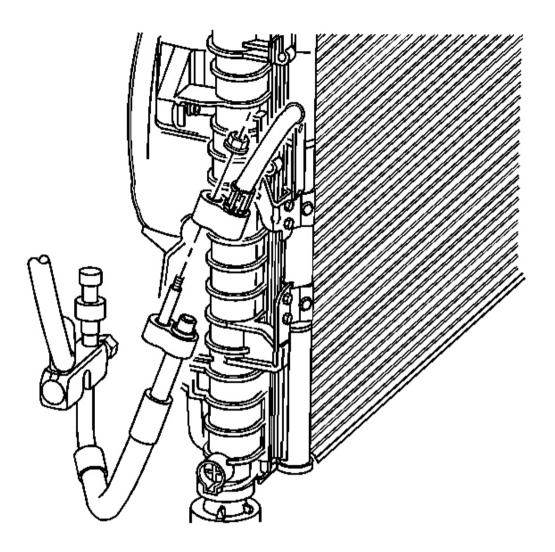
Compressor Hose, Nut & Evaporator Outlet Hose Courtesy of GENERAL MOTORS CORP.
